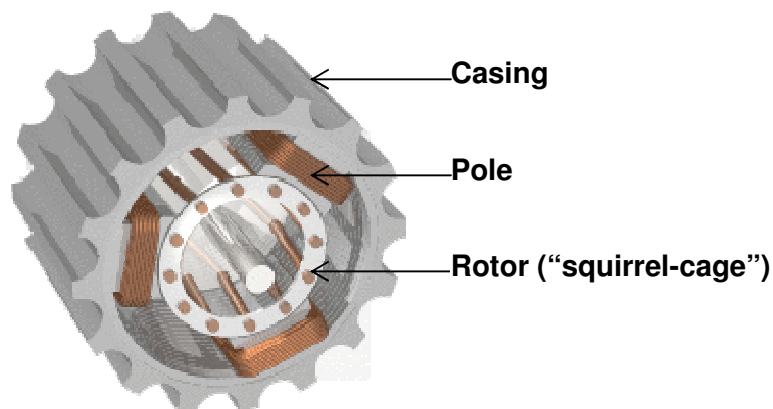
three-phase squirrel-cage induction motor (http://en.wikipedia.org/wiki/Induction_motor).
